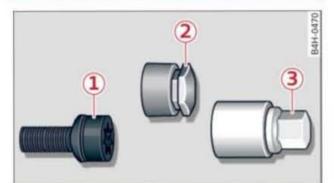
Anti-theft wheel bolt with wheel bolt cap and adapter
